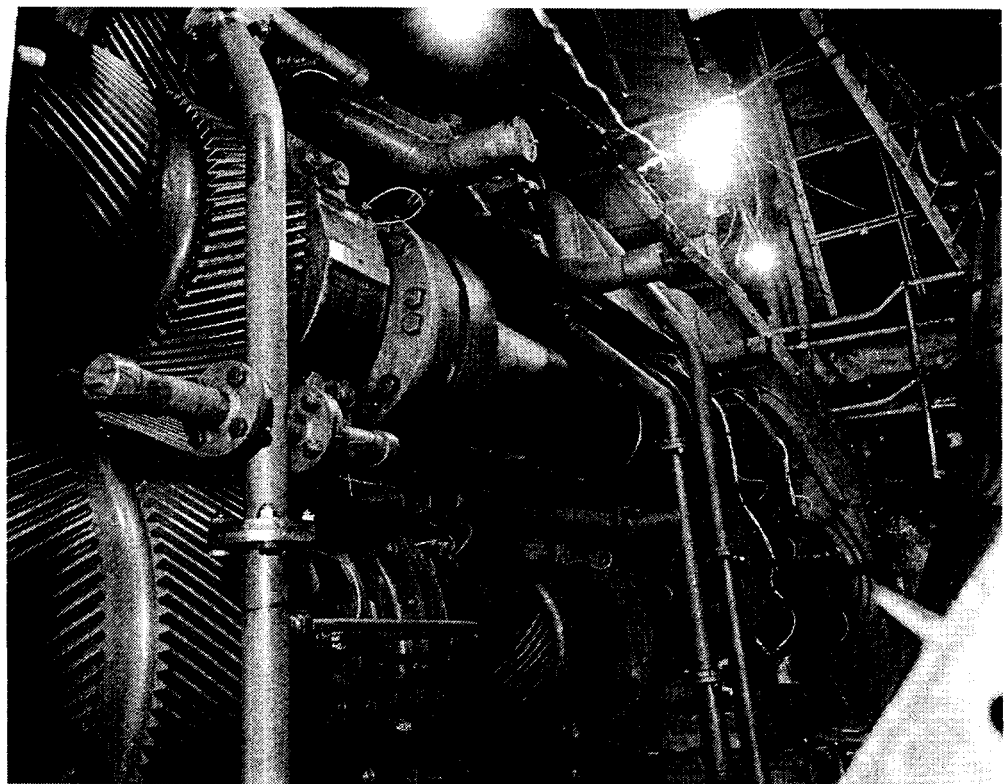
OUTBOARD SIDE OF THE GEARBOX SHOWING THE VIRTUALLY UNDAMAGED GEARS.
